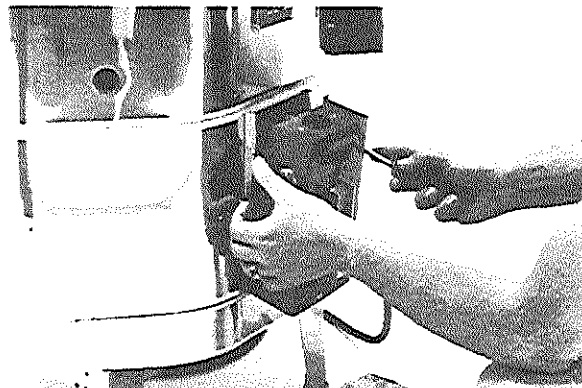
Starting top screws into their holes. Lower screws were started one at a time but only inserted about one turn.
